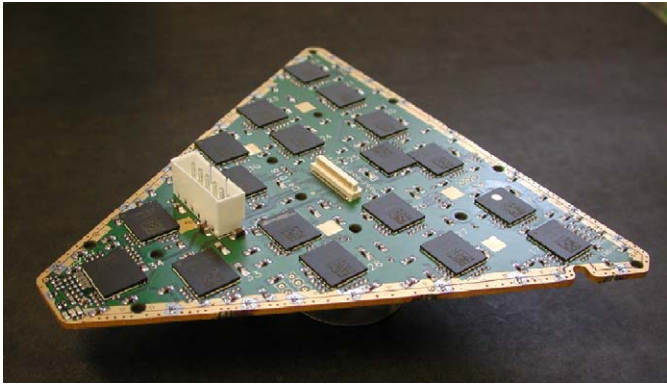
One of the 12 TRT barrel board designs with digital ASICs in their custom ball grid array packages shown on top, and analog readout with similar packaging assembled on the bottom. The boards are sized to fit into and make contact with the barrel support structure to enclose the straws in a Faraday shield.
